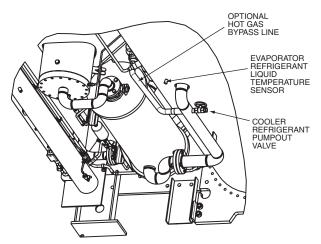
Evaporator Refrigerant Liquid Temperature Sensor on Bottom of Cooler
